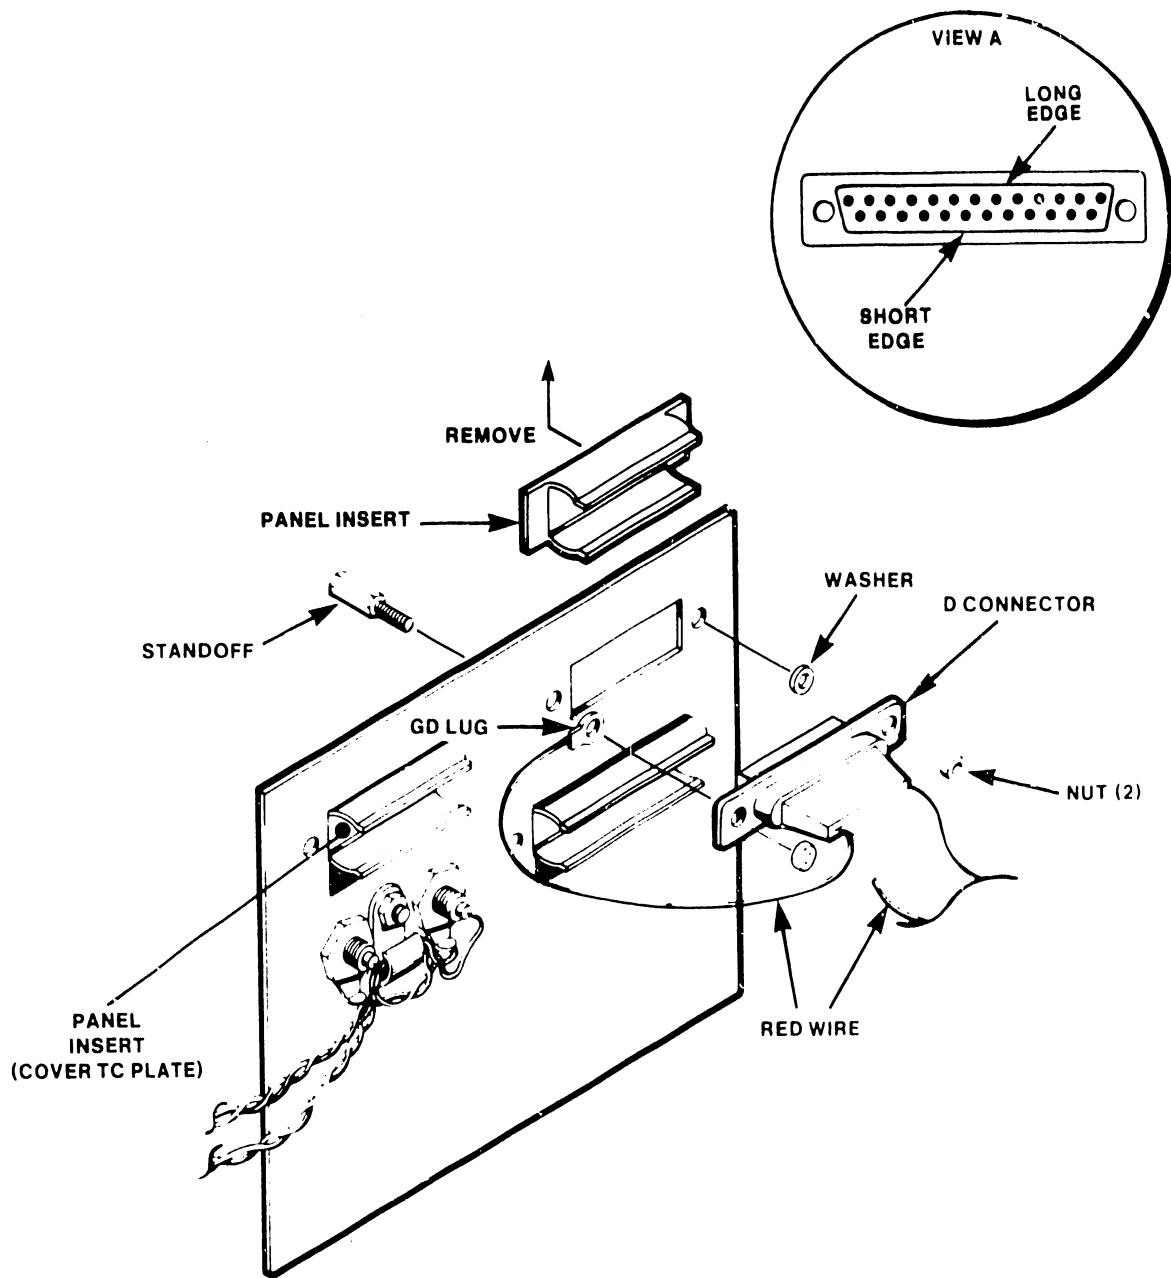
RS-232-C or RS-366 Interface Cable Installation
